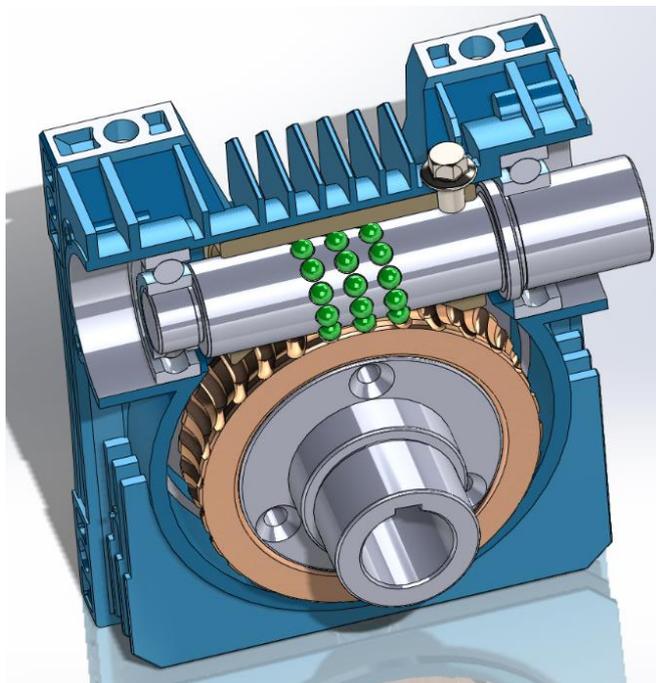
Cross-section view of the assembled ball worm gear mechanism
